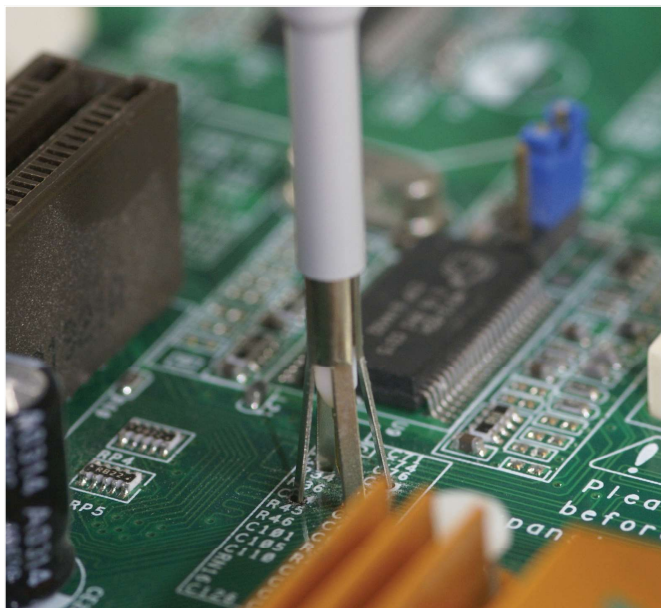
The Keysight N2885A PCB adapter sockets are designed to solder into a printed circuit board (PCB) as test points to minimize ground inductance and maximize signal fidelity. This package contains 25 sockets.
